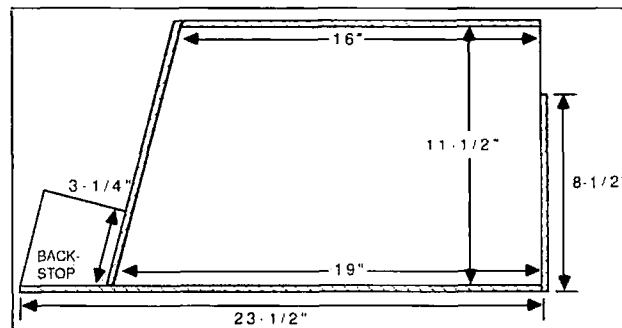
Driver's side view of the console box. Wood screws (#8 X 1½ inches) hold the top, bottom, back, and sloping front into the two trapezoidal pieces.
